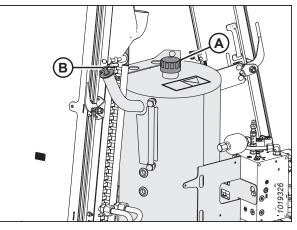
Hydraulic Oil Filler Neck and Breather Tube
